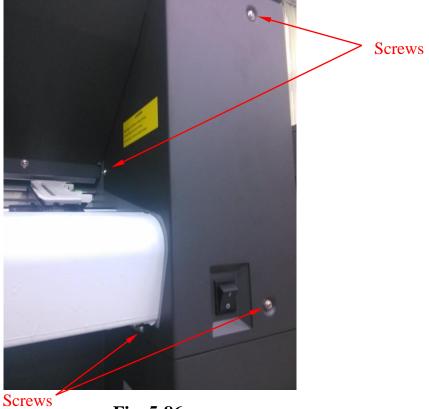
7. Remove the screws to detach the right side cover (1).
